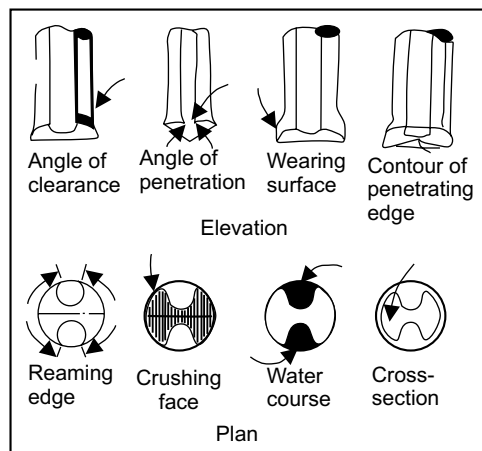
Details of the cutting edge of drill bits used in cable tool drilling
